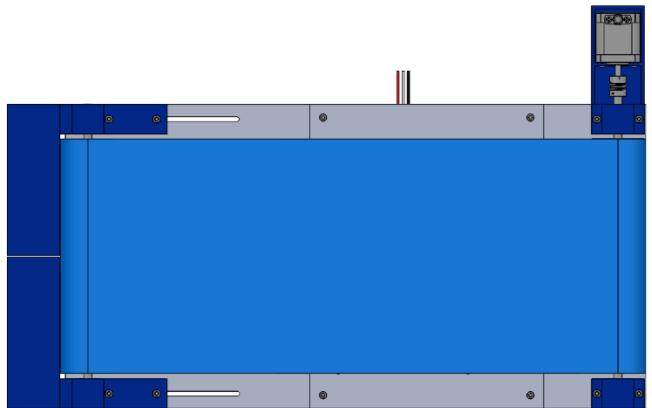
Top-down view of the fully-assembled printer modification assembly.
